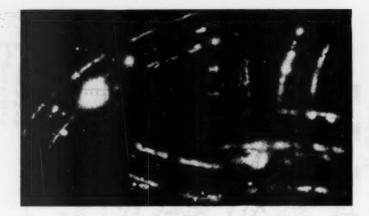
$\label{eq:fig.33}$ Chip autoradiographs when cutting AISI 1045 with K2S carbide. s = 0.26, t = 1.5. Cutting speed 9 m/min.
